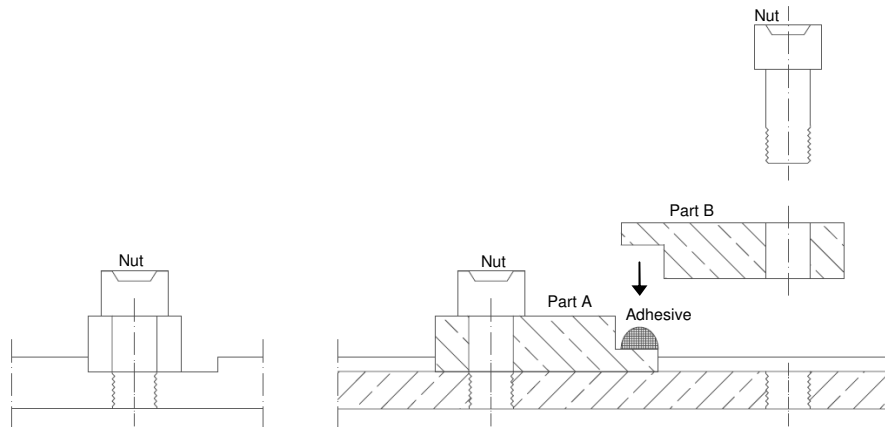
Aluminum template to prepare the adhesively bonded specimens.
